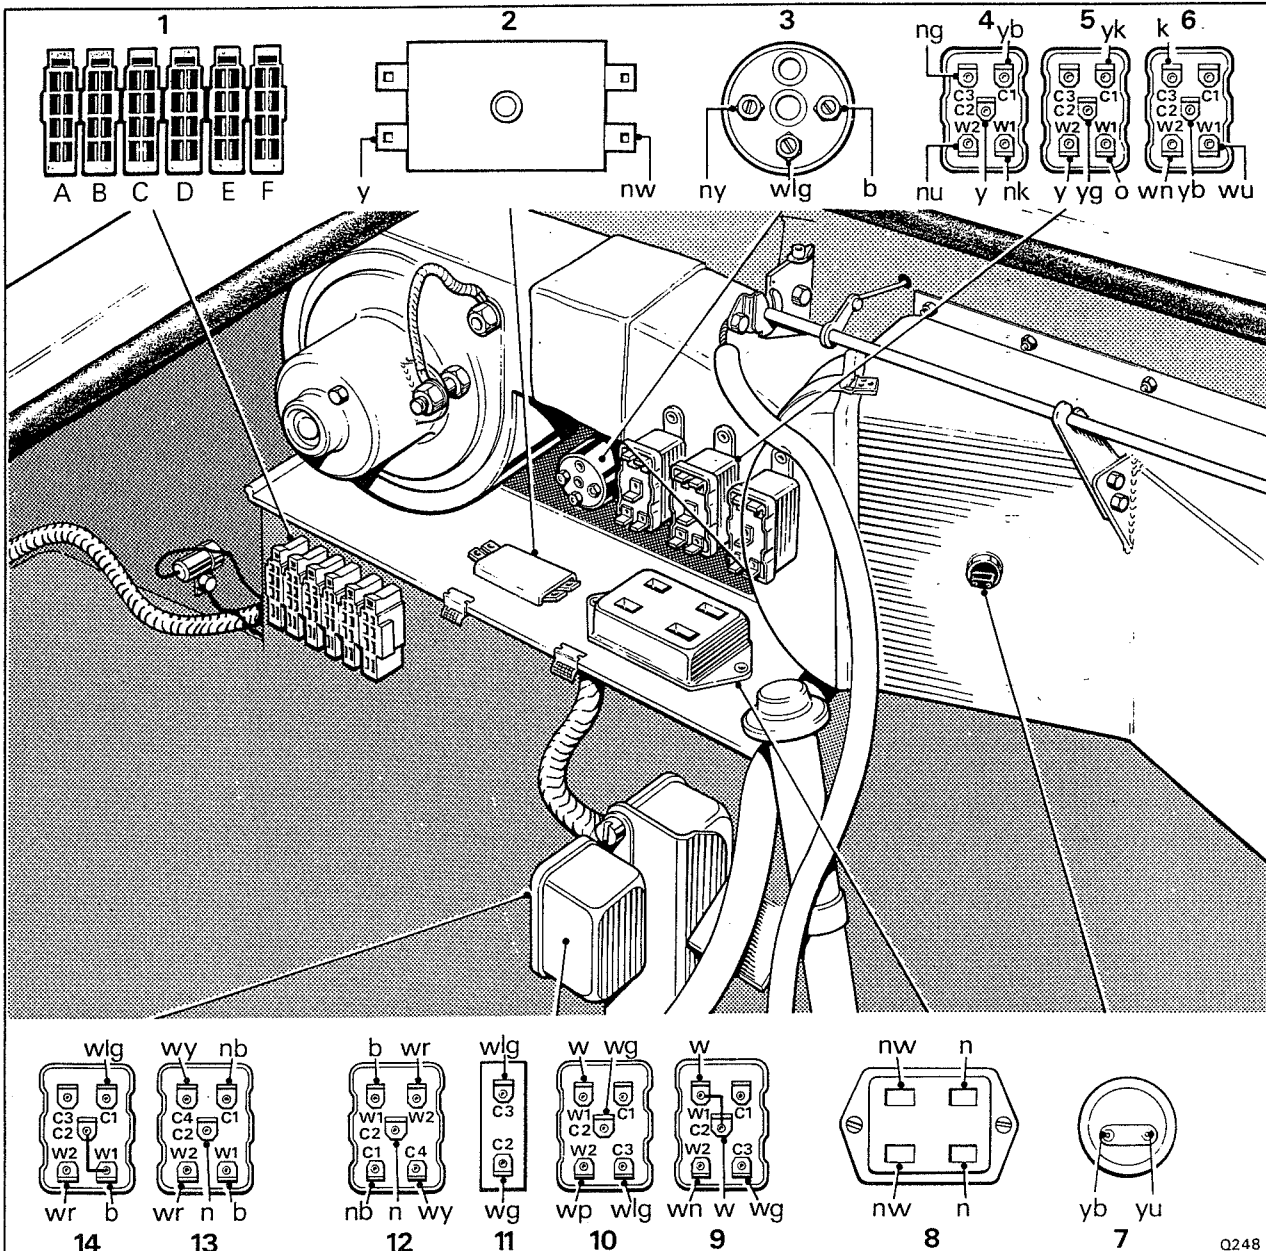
Electrical disconnection points for engine and sub-frame removal
